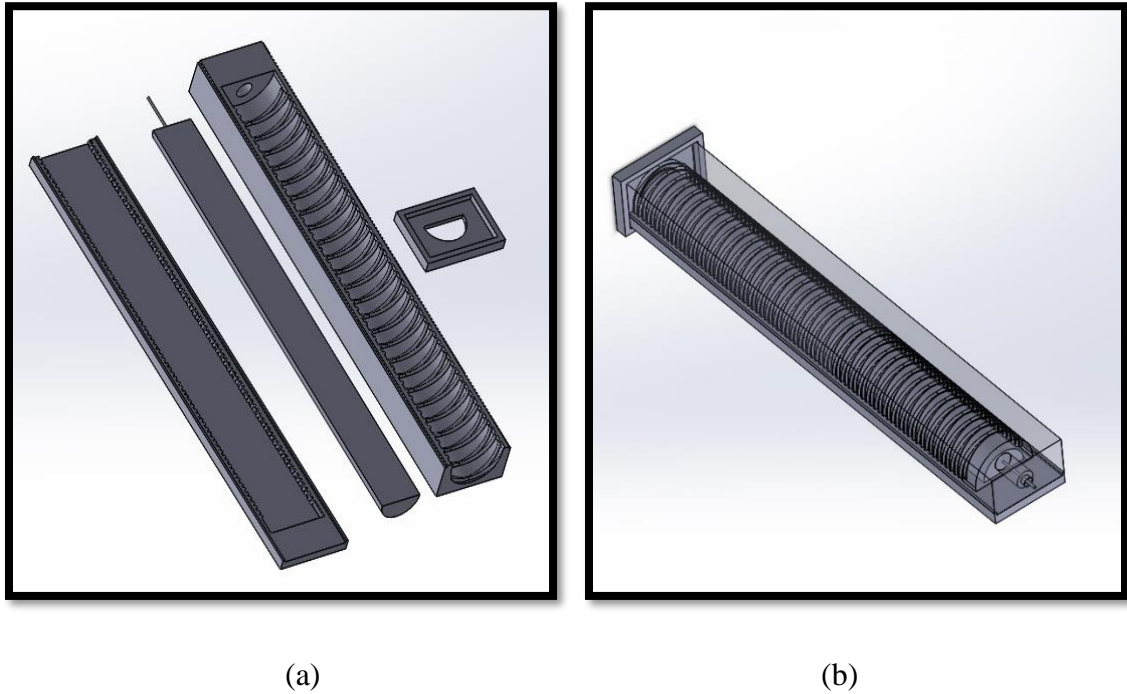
(a)Fiber-Reinforced with $n=25$ windings inner mold design and parts. (b)Reinforced actuator inner mold parts assembled on SolidWorks.
